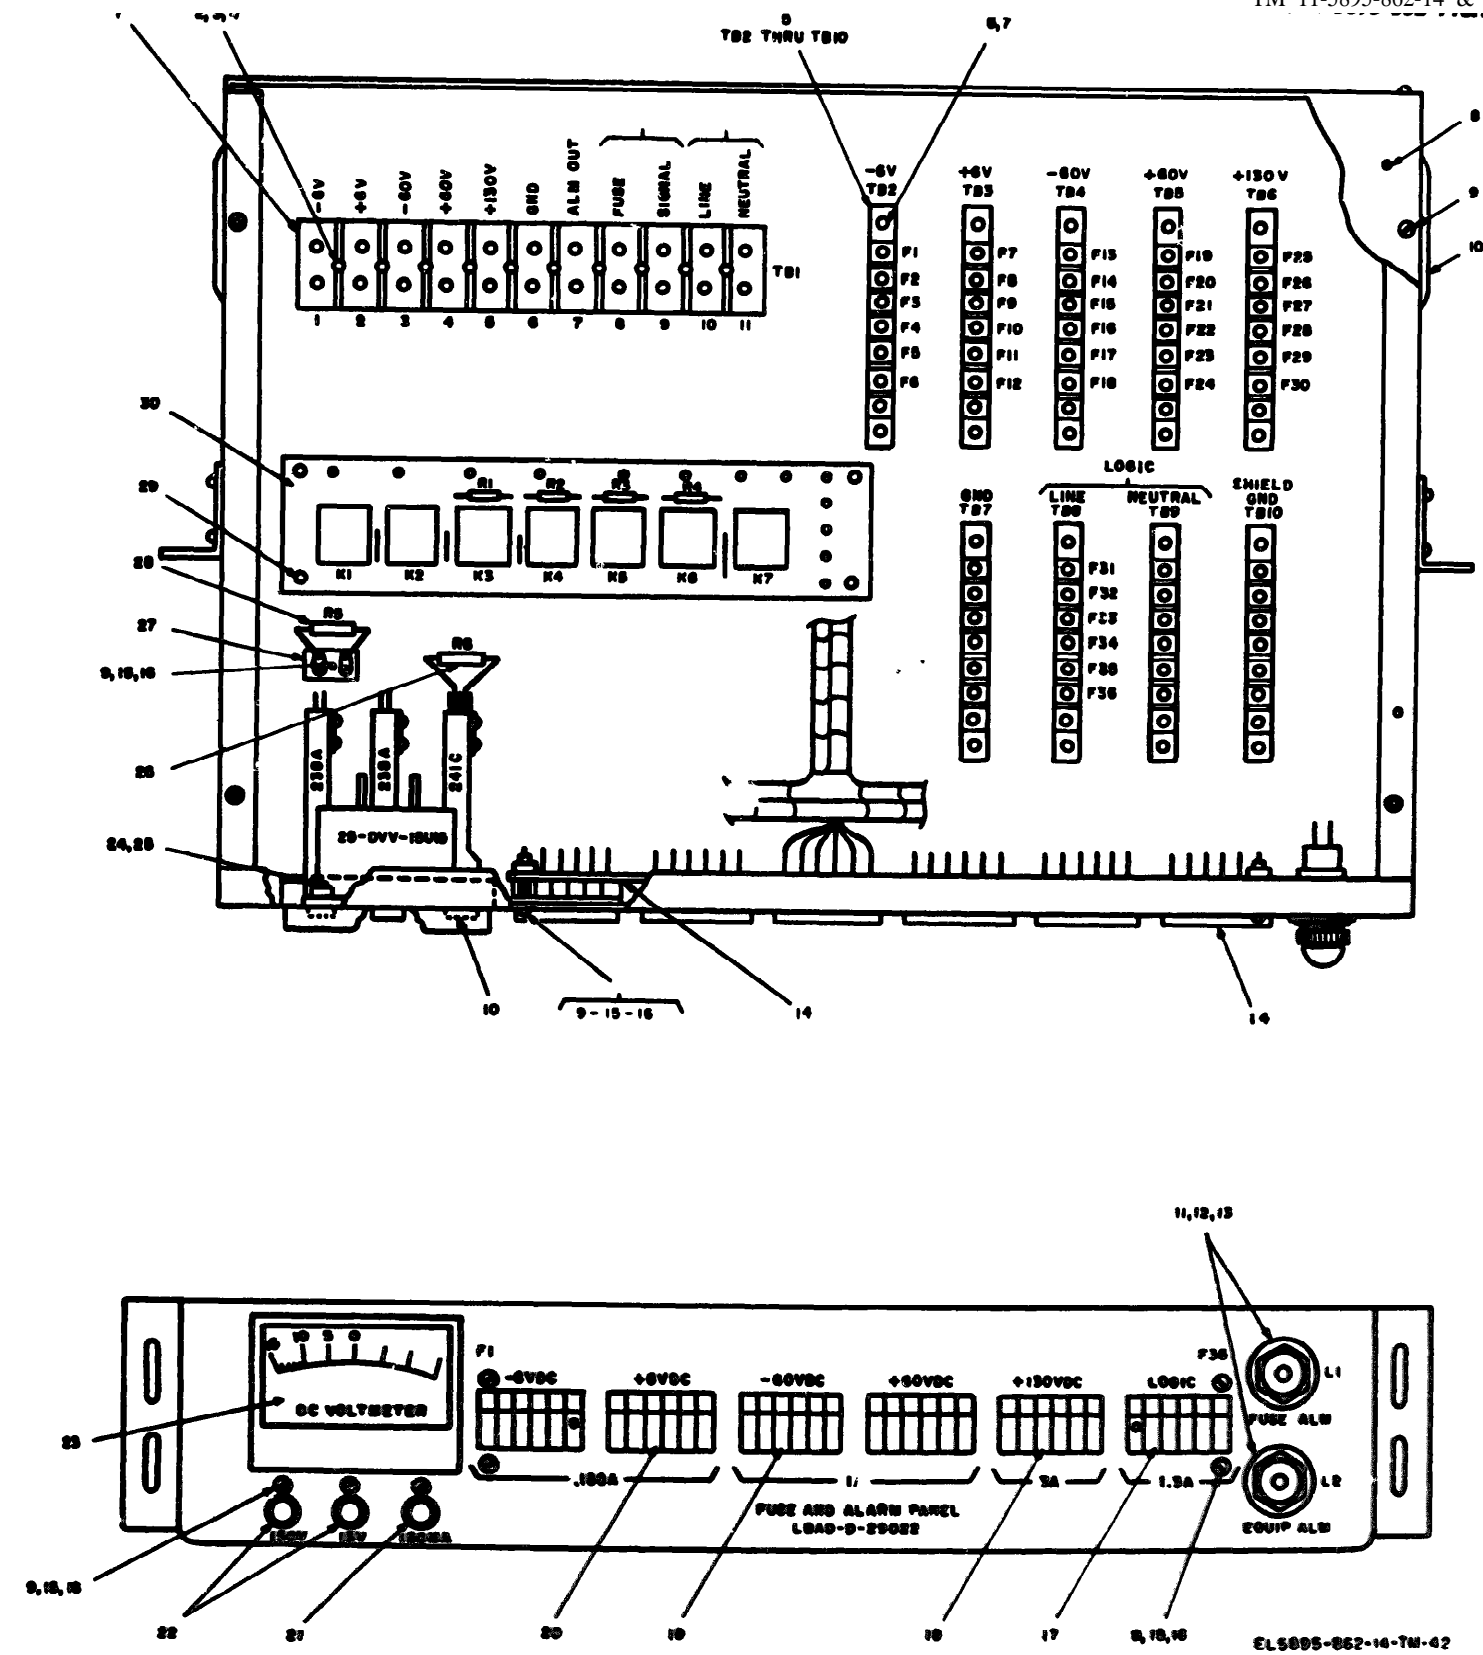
Fuse and Alarm Panel Assembly, Parts Location
